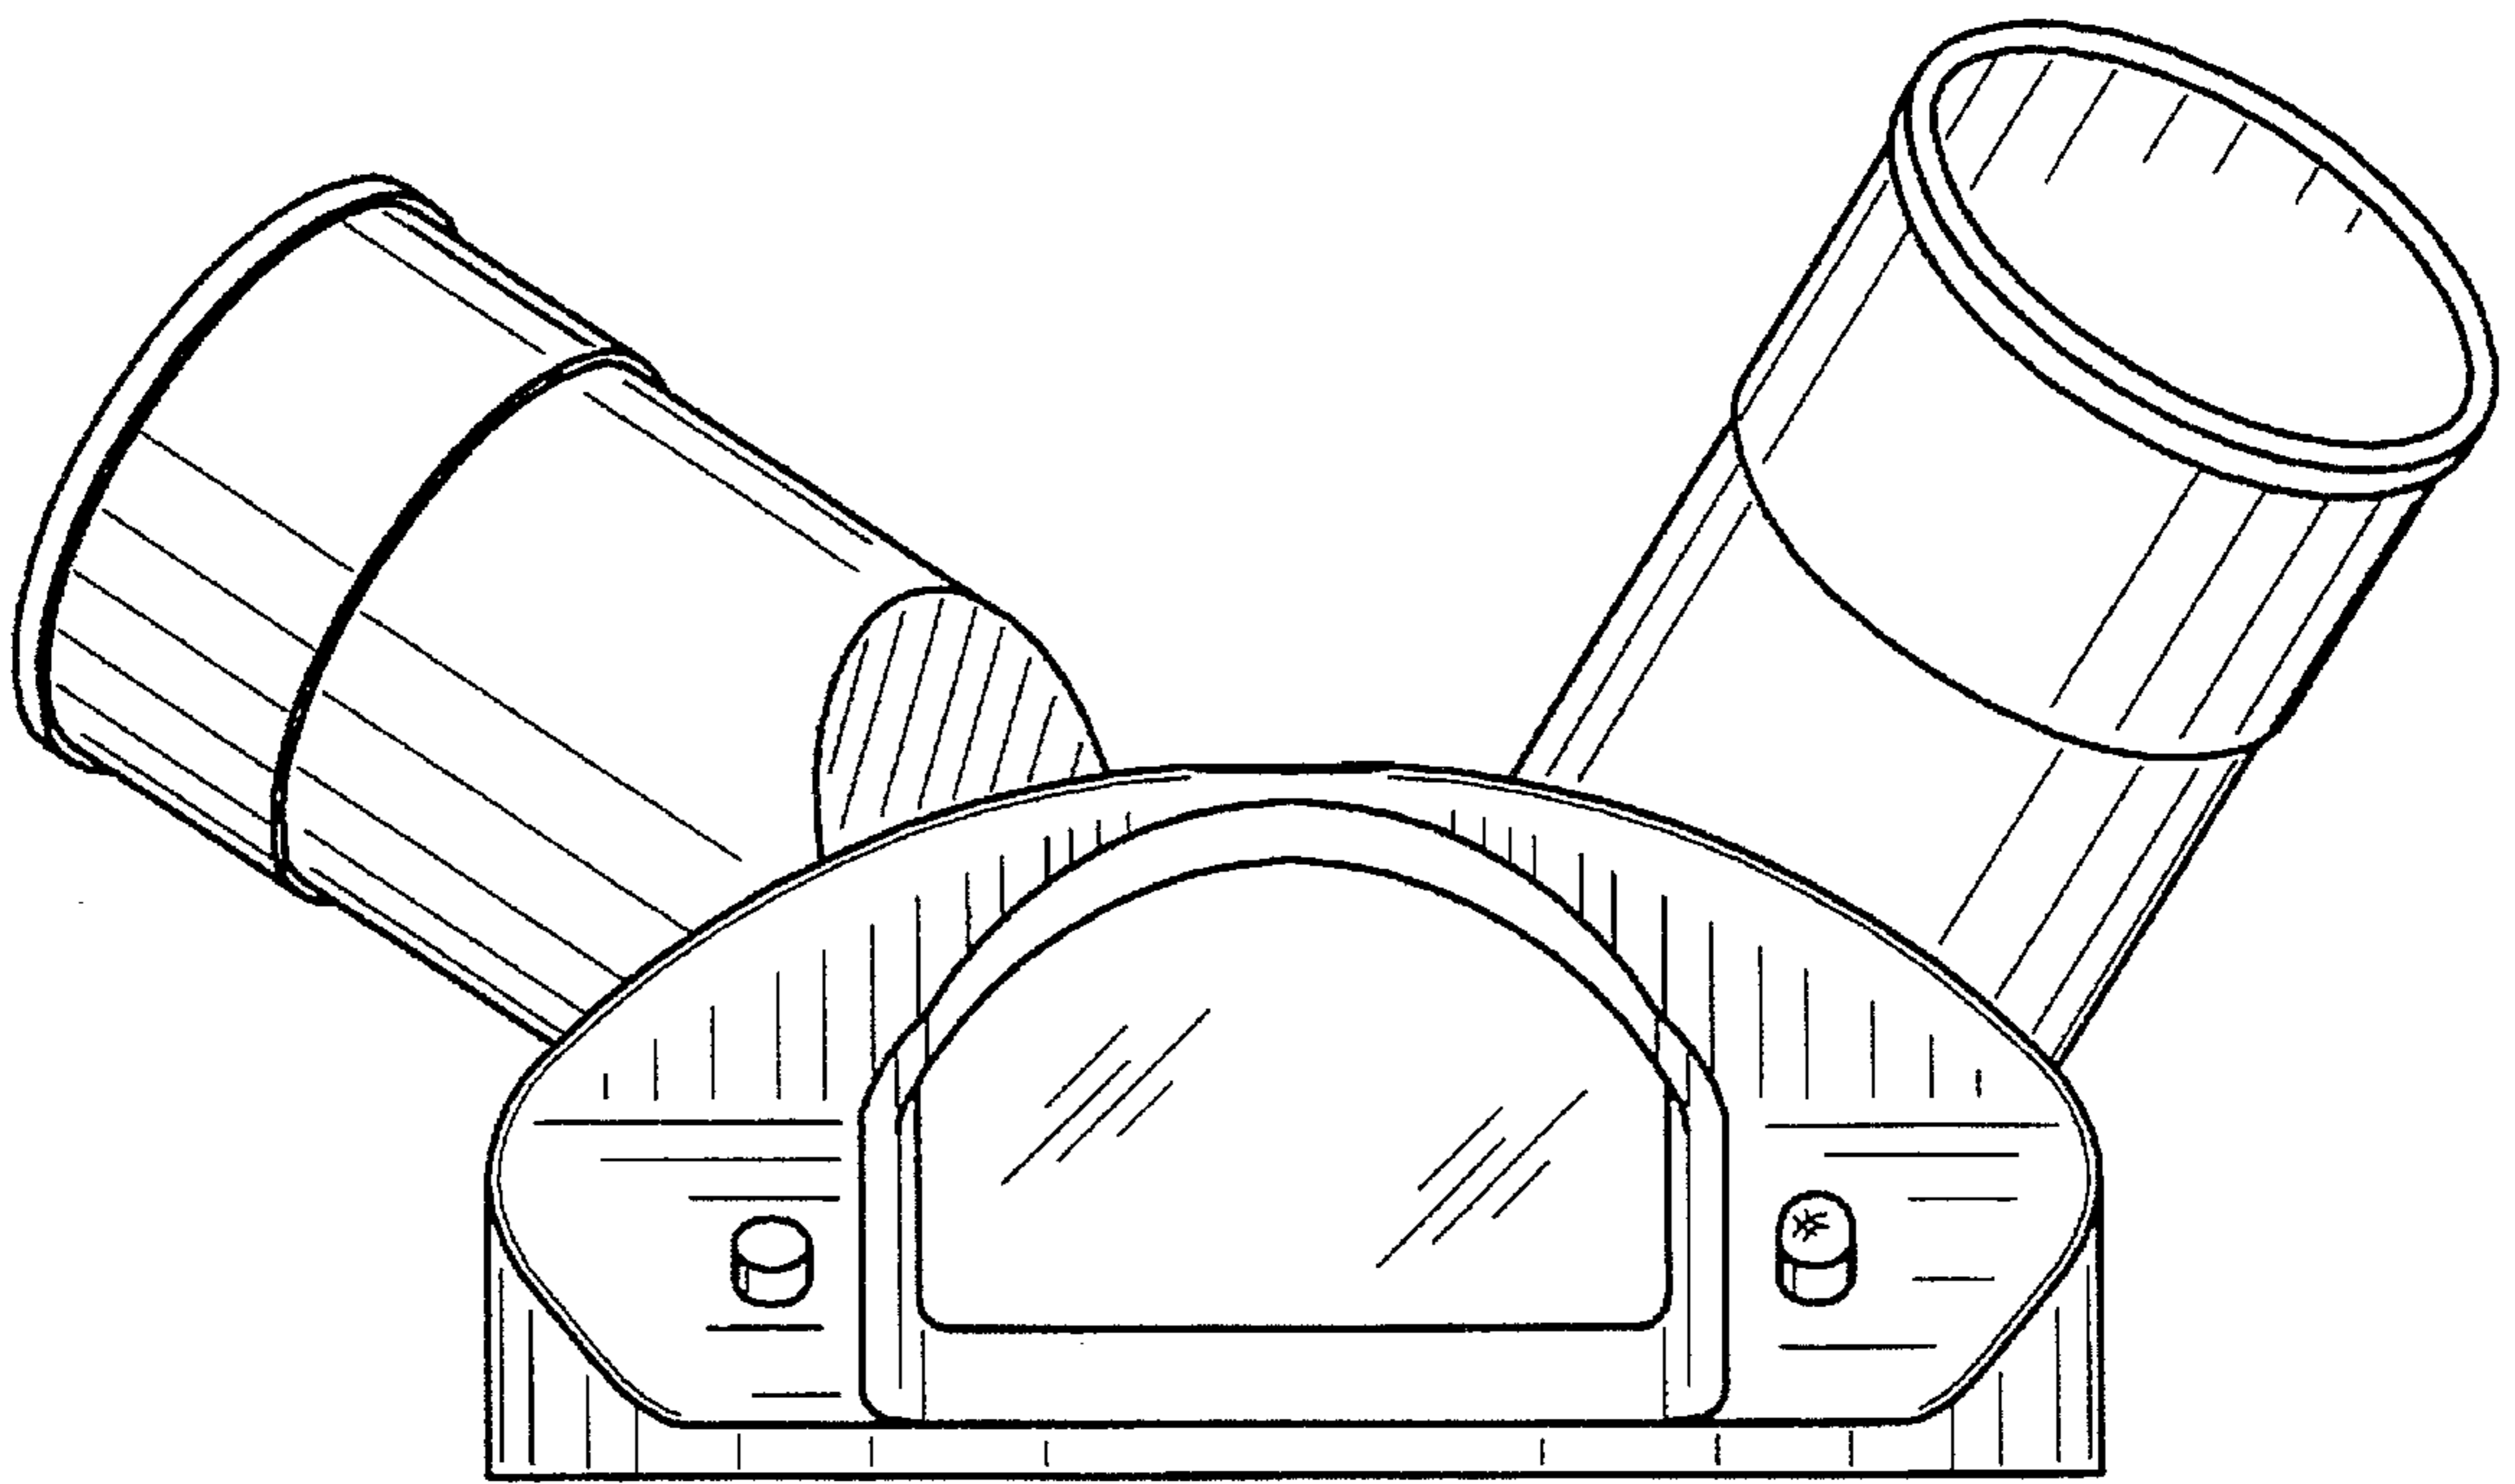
is a left-hand side elevational view of the fixture of FIGS. 1-3, the right-hand side being a mirror image, but for the shape of the small protrusion to the right-hand side of the motion detector, the top of which is convex, rather than flat;
